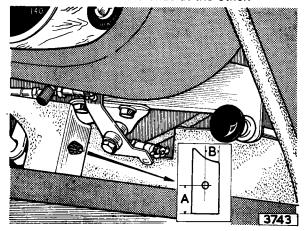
Drilling the front parcel tray for balance control mounting
